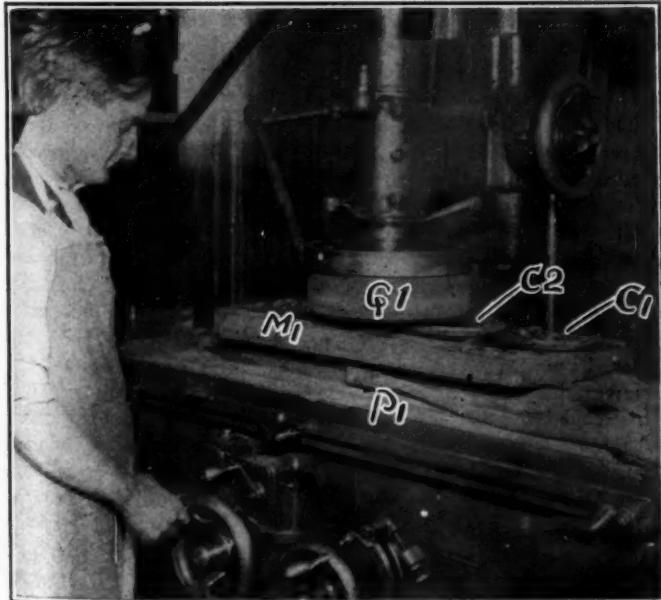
Flat grinder with magnetic chuck working on hand-hole plates in the Excelsior plant
